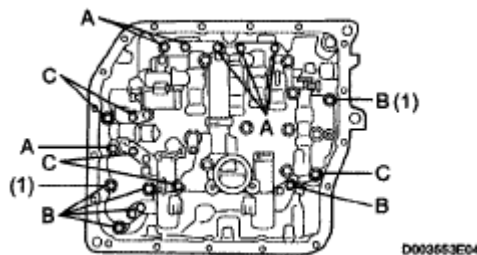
Installing Valve Body With Bolts To Transaxle Case
